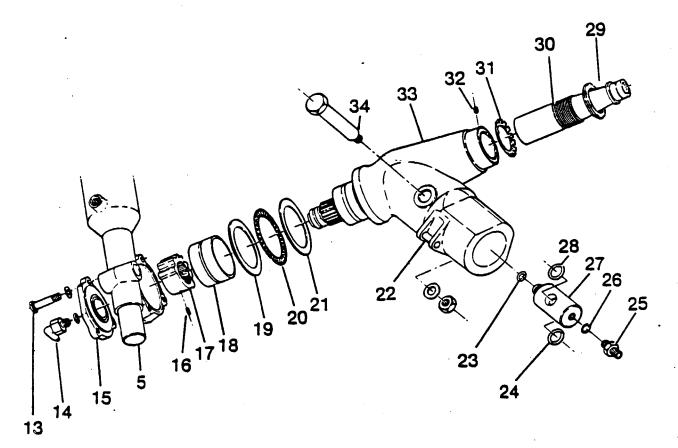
Main Gear Actuator and Pivot Assembly (Sheet 2 of 3)
